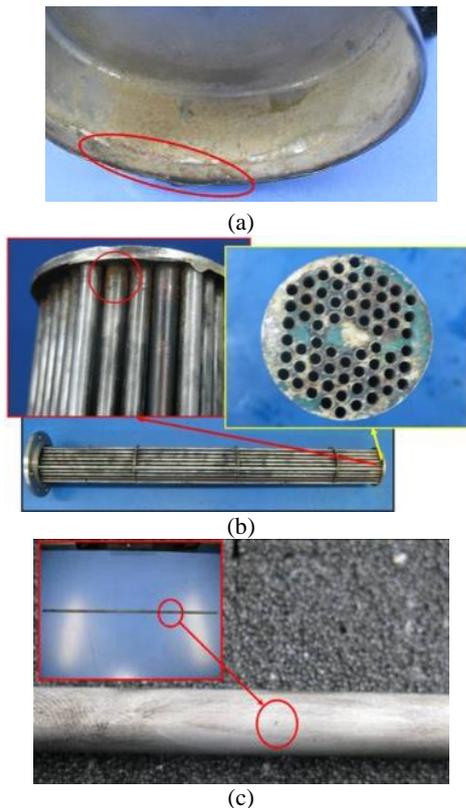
Leakage regions (a) in the hub, (b) between tubes and the tube sheet, (c) on the external surfaces of tubes as tiny holes
